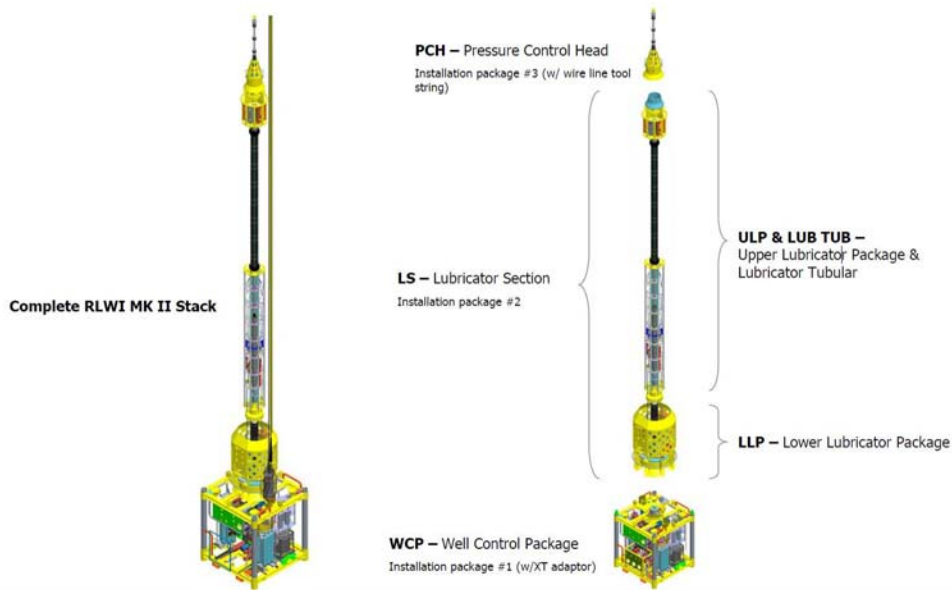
RLWI Stack (Well control package and Lubricator section) [14]
